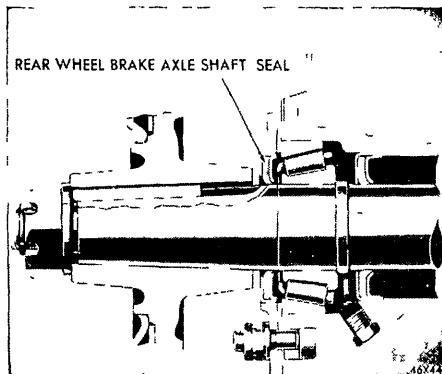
Wheel bearing and axle shaft details, 1946-52
